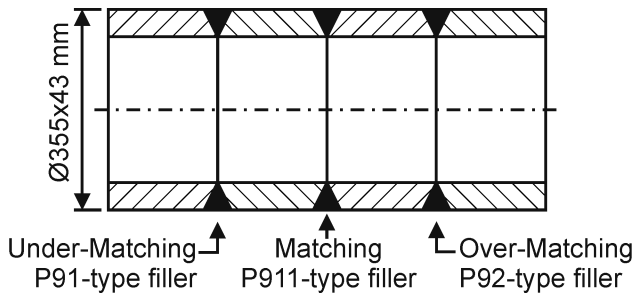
Schematic of the welding setup of four P911 pipe sections using three different filler metals differing in creep strength.
